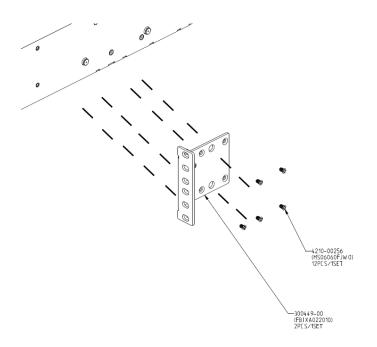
Attaching a Short Mounting Bracket (Ear): Middle of Device
